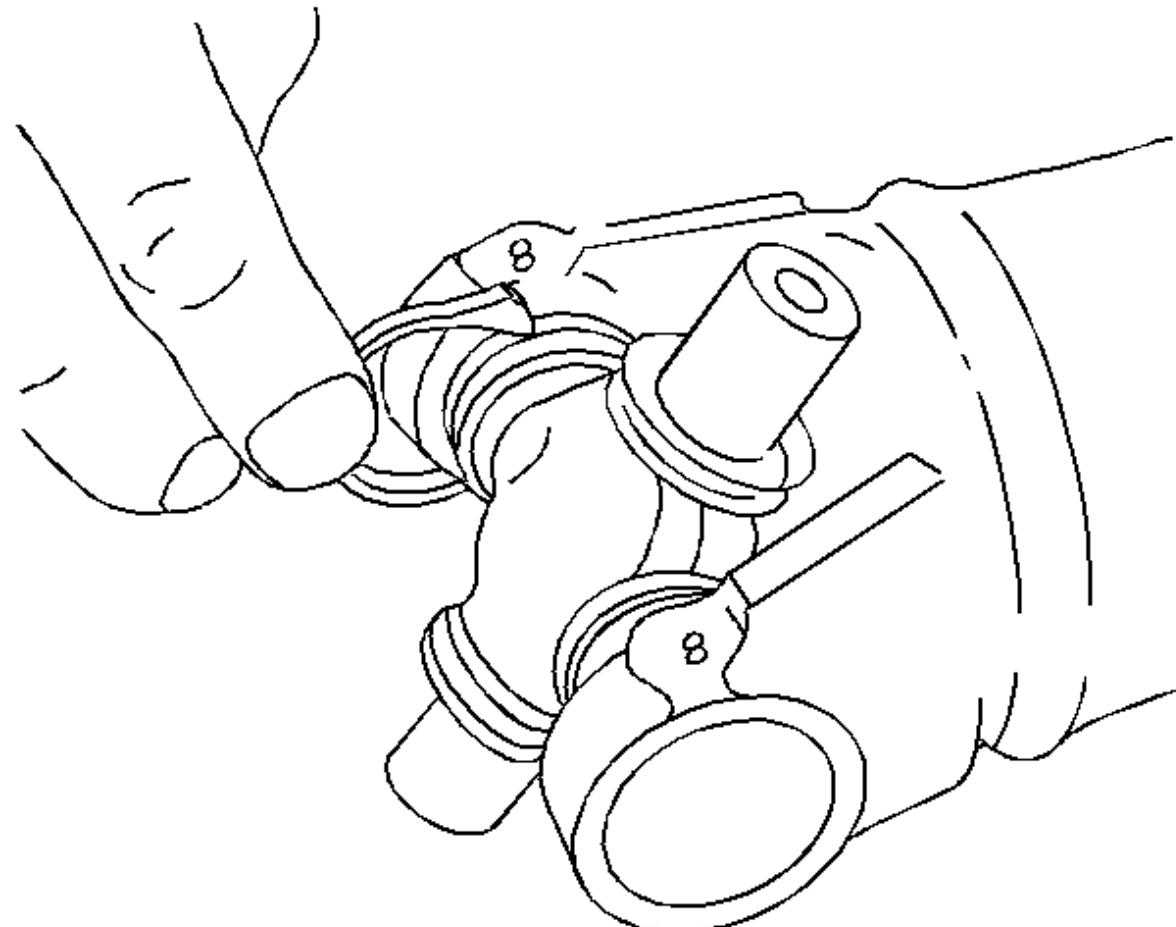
Assembling Bearing Retainer In Retainer Groove
